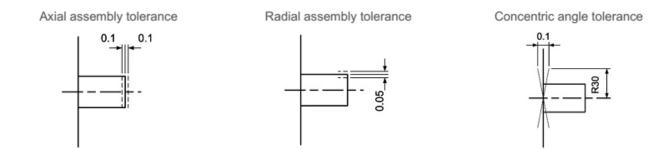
Required dimensions for motor assembly (units = mm) / D = 4mm
